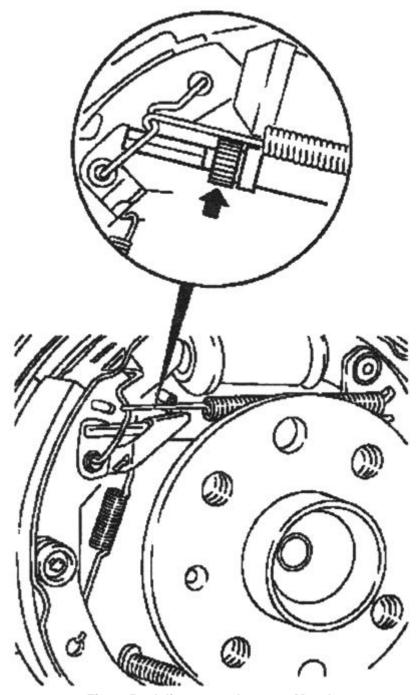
Adjustment drum tor Mozah Car Opel Astra
